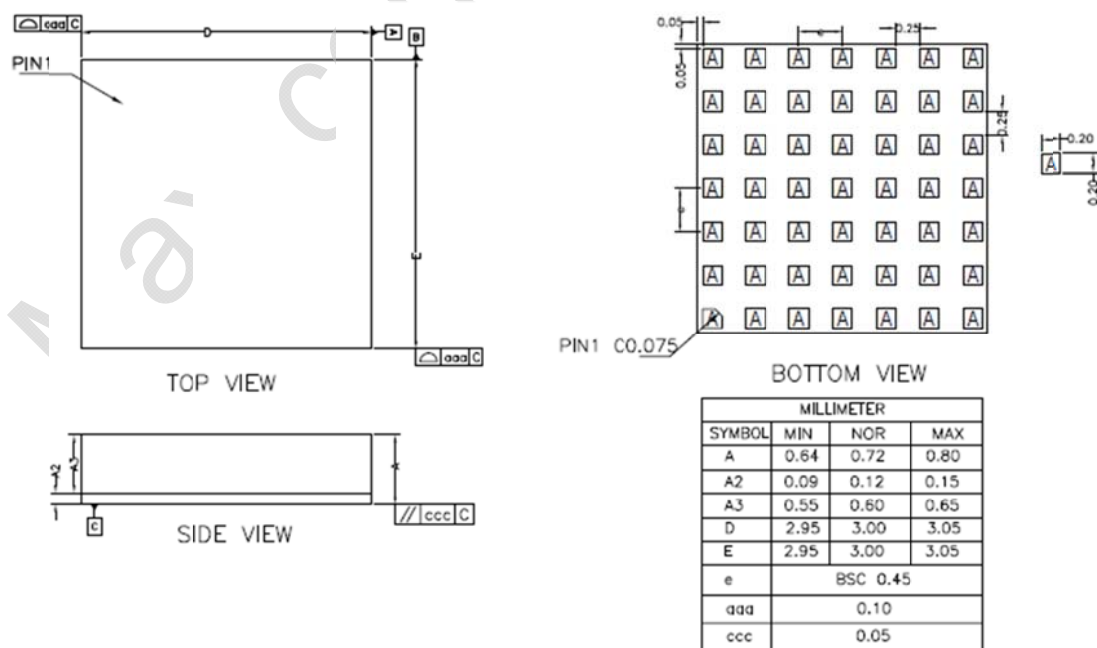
MXD2660C LGA49 Package Outline Drawing
